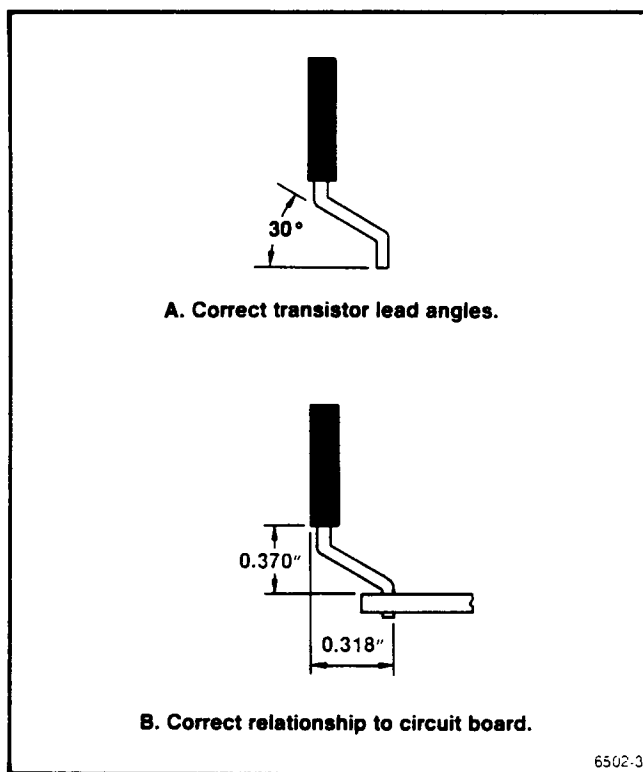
Series pass transistor replacement. (Shown actual size.)
